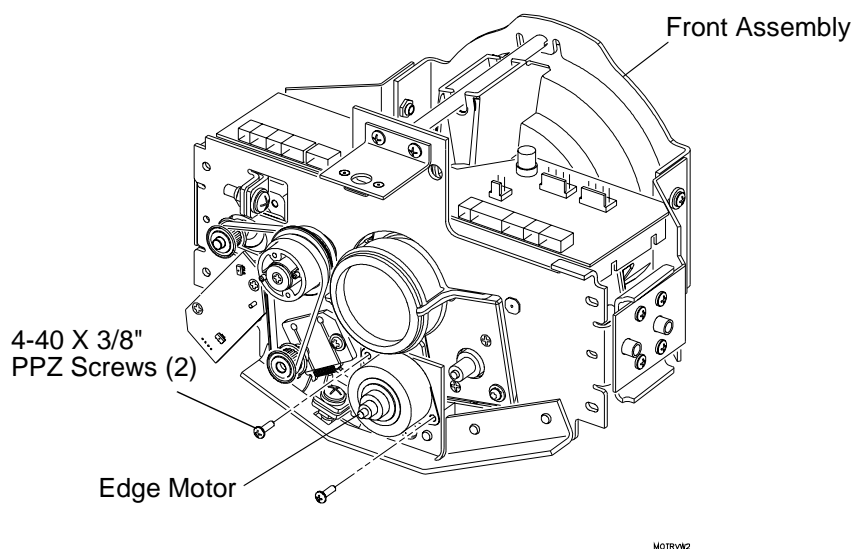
Removing Edge Motor Assembly Attaching Hardware
